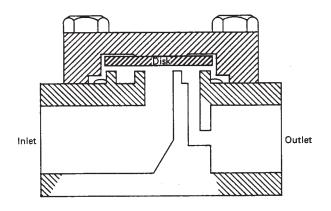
Disk-type steam trap. (Courtesy of Armstrong Machine Works.)
